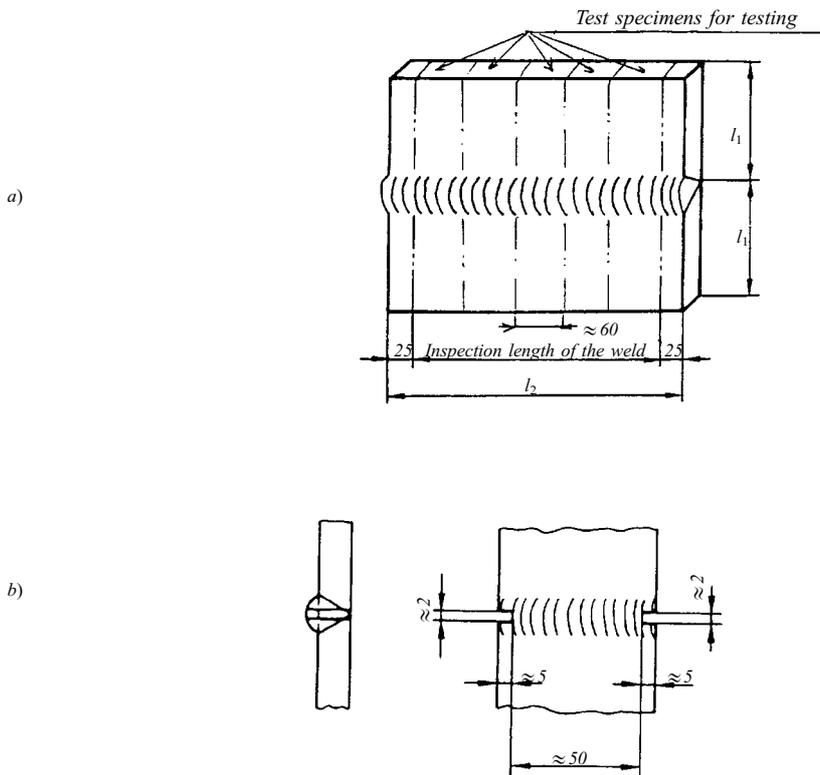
Diagram of cutting-out (a) and test specimens from the test piece P_1 of the butt plate joint for weld metal fracture testing (b)
